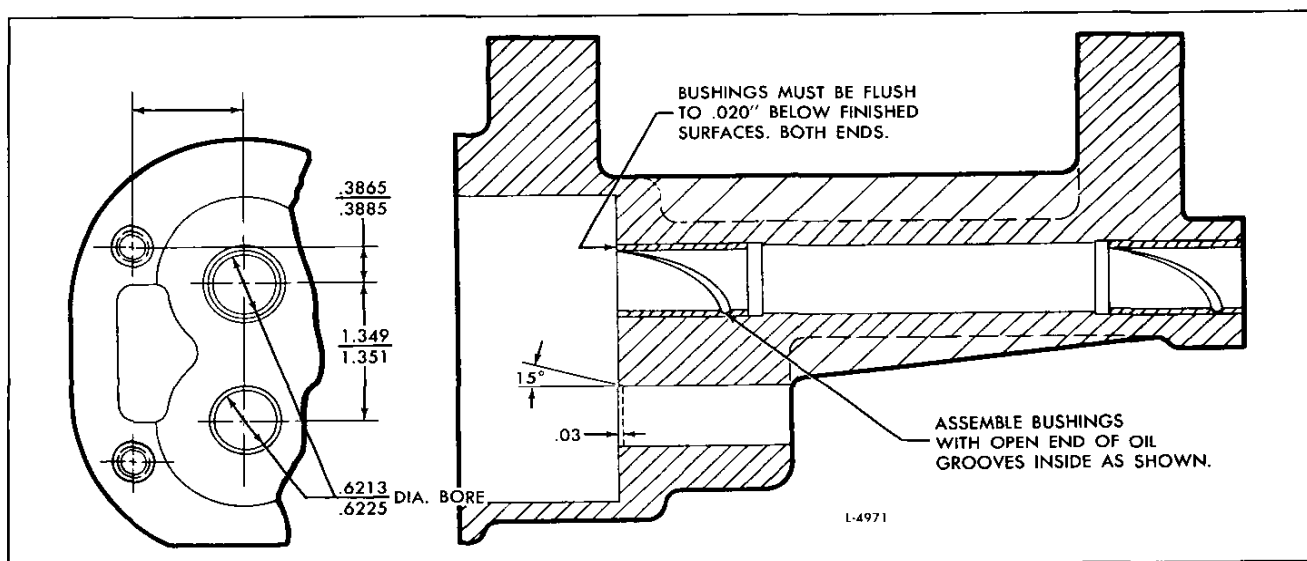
Diameter and Location of Bushings in Oil Pump Body
